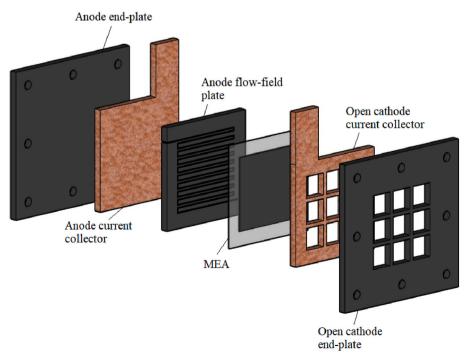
Exploded view of an air-breathing PEFC showing its key components.
